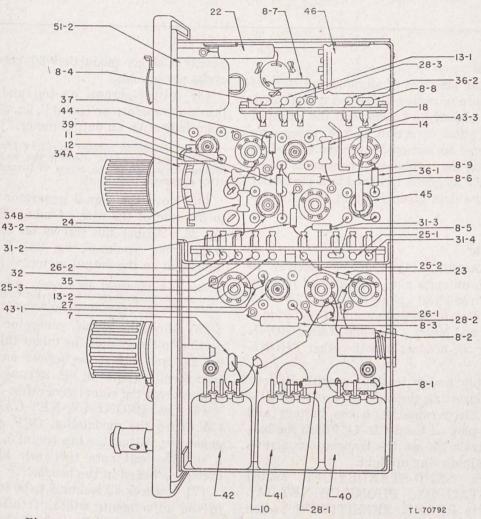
Parts identification of receiver, bottom view, of Radio Receiver and Transmitter BC-1306.
